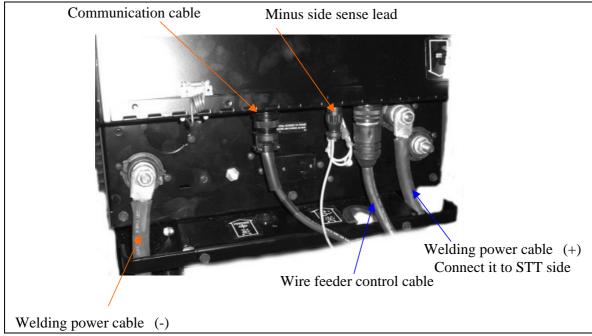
(h) Connection of ROBOWELD iC/H2 (PowerWave 455M/STT) (1/5)
